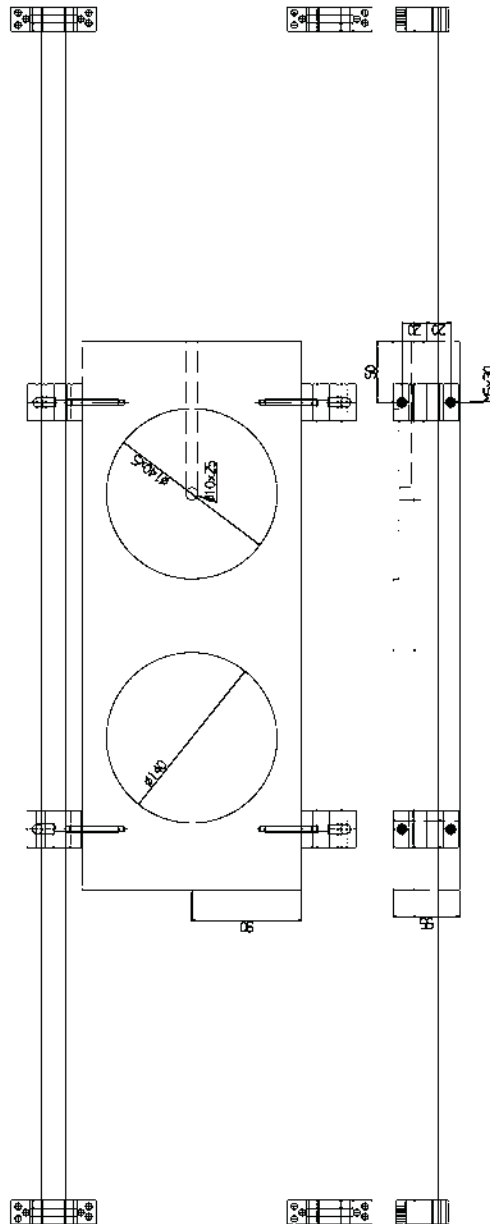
Dimensional drawing of the Shutter (top and side view without base-plate and motor).
